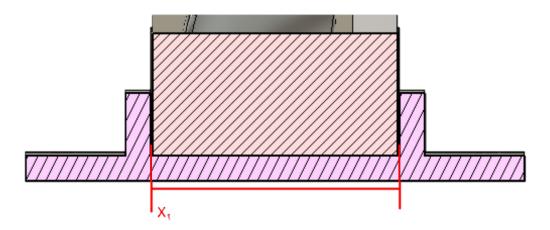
FAN AND FAN BASE FIT REFERENCE
